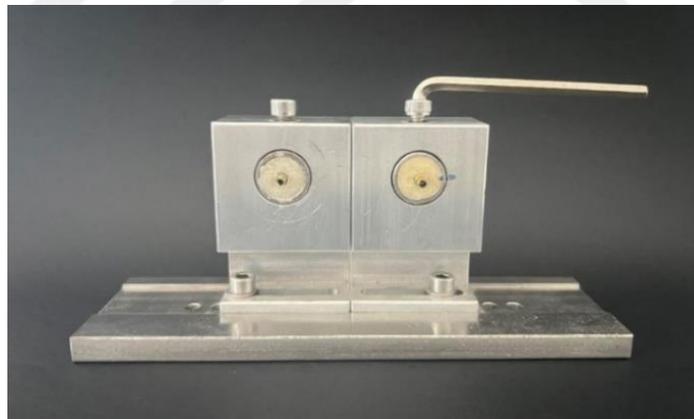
Specimens Secured in Custom holder with the hex key.
